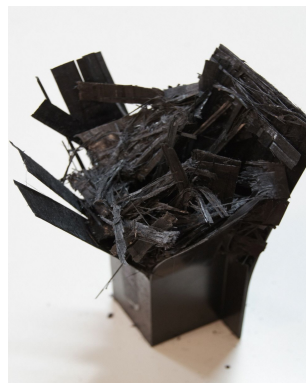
Collapsed shape of CFRP hat-shaped sectional member, 6 interface (dry specimen, outer angle  $0^\circ$ )
